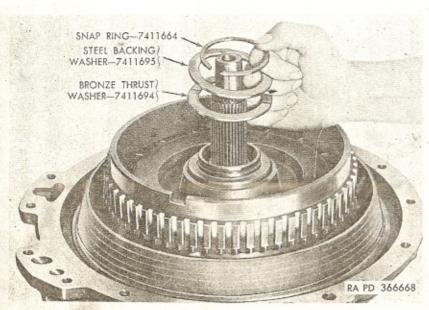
Removing or installing reduction unit clutch drum rear thrust washers and snap ring (303M).
